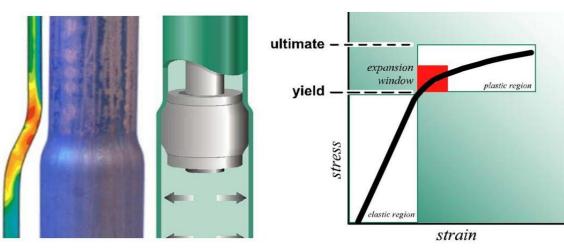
Cutaway section showing expansion cone (mandrel) and aligner
